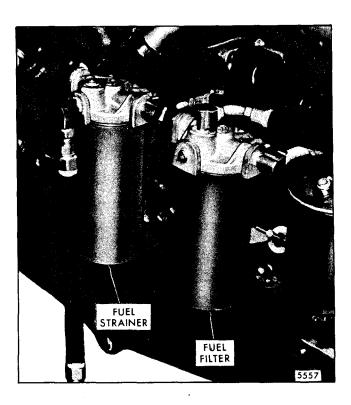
Typical Spin-On Fuel Filter and Strainer Mounting
